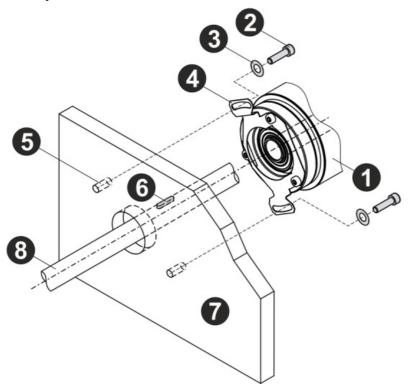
Mounting with torque holder (Spring metal sheet with two wings), principle illustration
